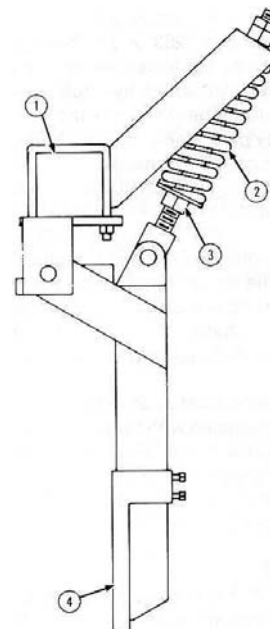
Hoe Assembly: (1) Frame Mounts, (2) Trip Spring, (3) Adjusting Nuts, (4) Hoe Opener.
